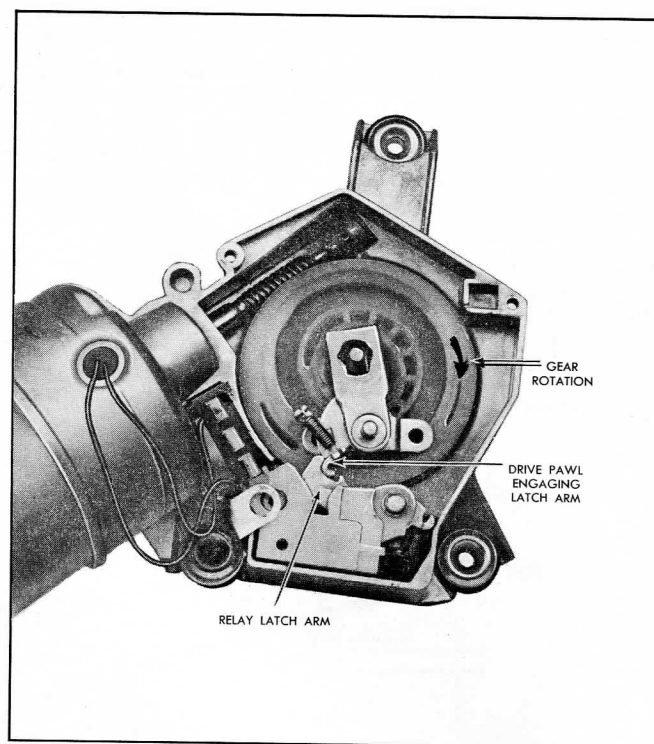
Drive Pawl Engaging Latch Arm on Pontiac and Optional Tempest
